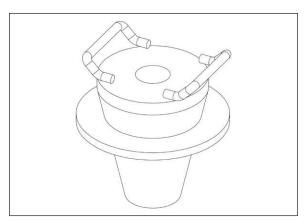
Mr. Valve Centering Cone & Reducer Ring
